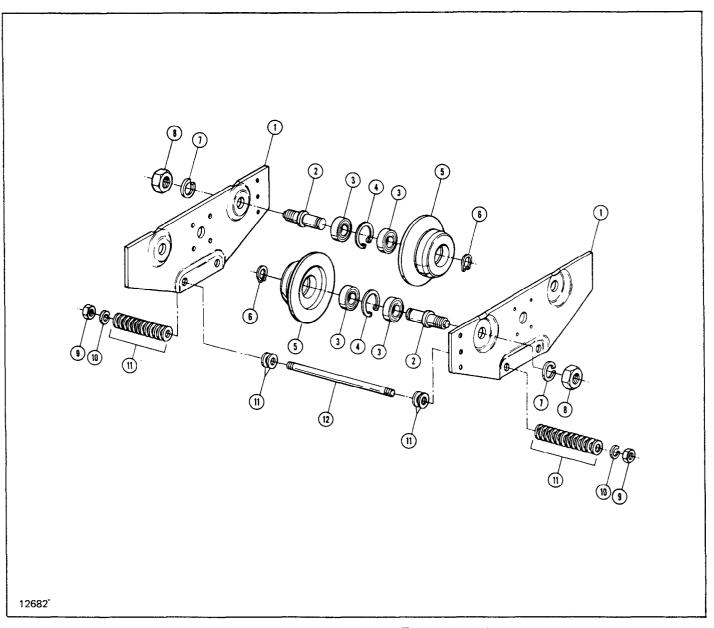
Push Type Rigid Mount Trolley Assembly. (4" ϕ Wheels - 3-1/8" and 5" c/c Pins.)
